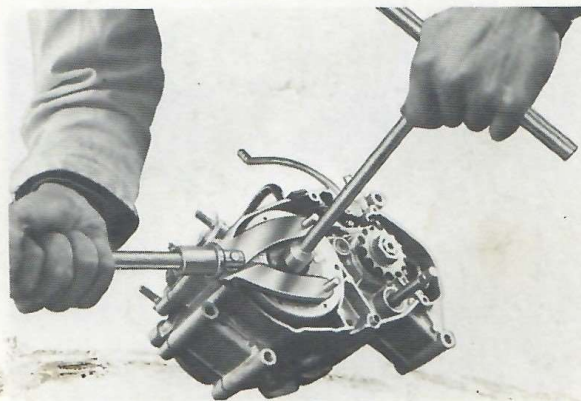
Removing flywheel rotor nut with 17 mm wrench and engine sprocket & flywheel holder (special tool No. 09930-40113)
